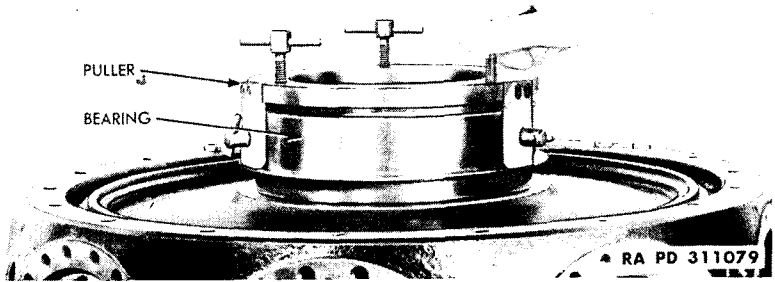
Removing Cam Bearing, Using Puller 5A2305
